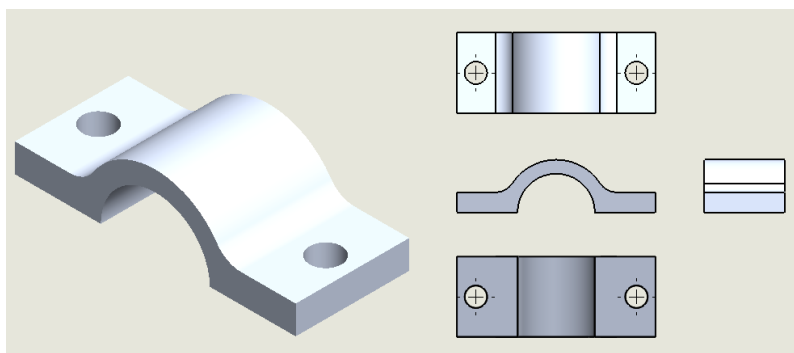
SolidWorks CAD drawing of the actuator housing support motor holder. Left: support holder isometric view. Right: support holder front, top, back, and lateral view.
